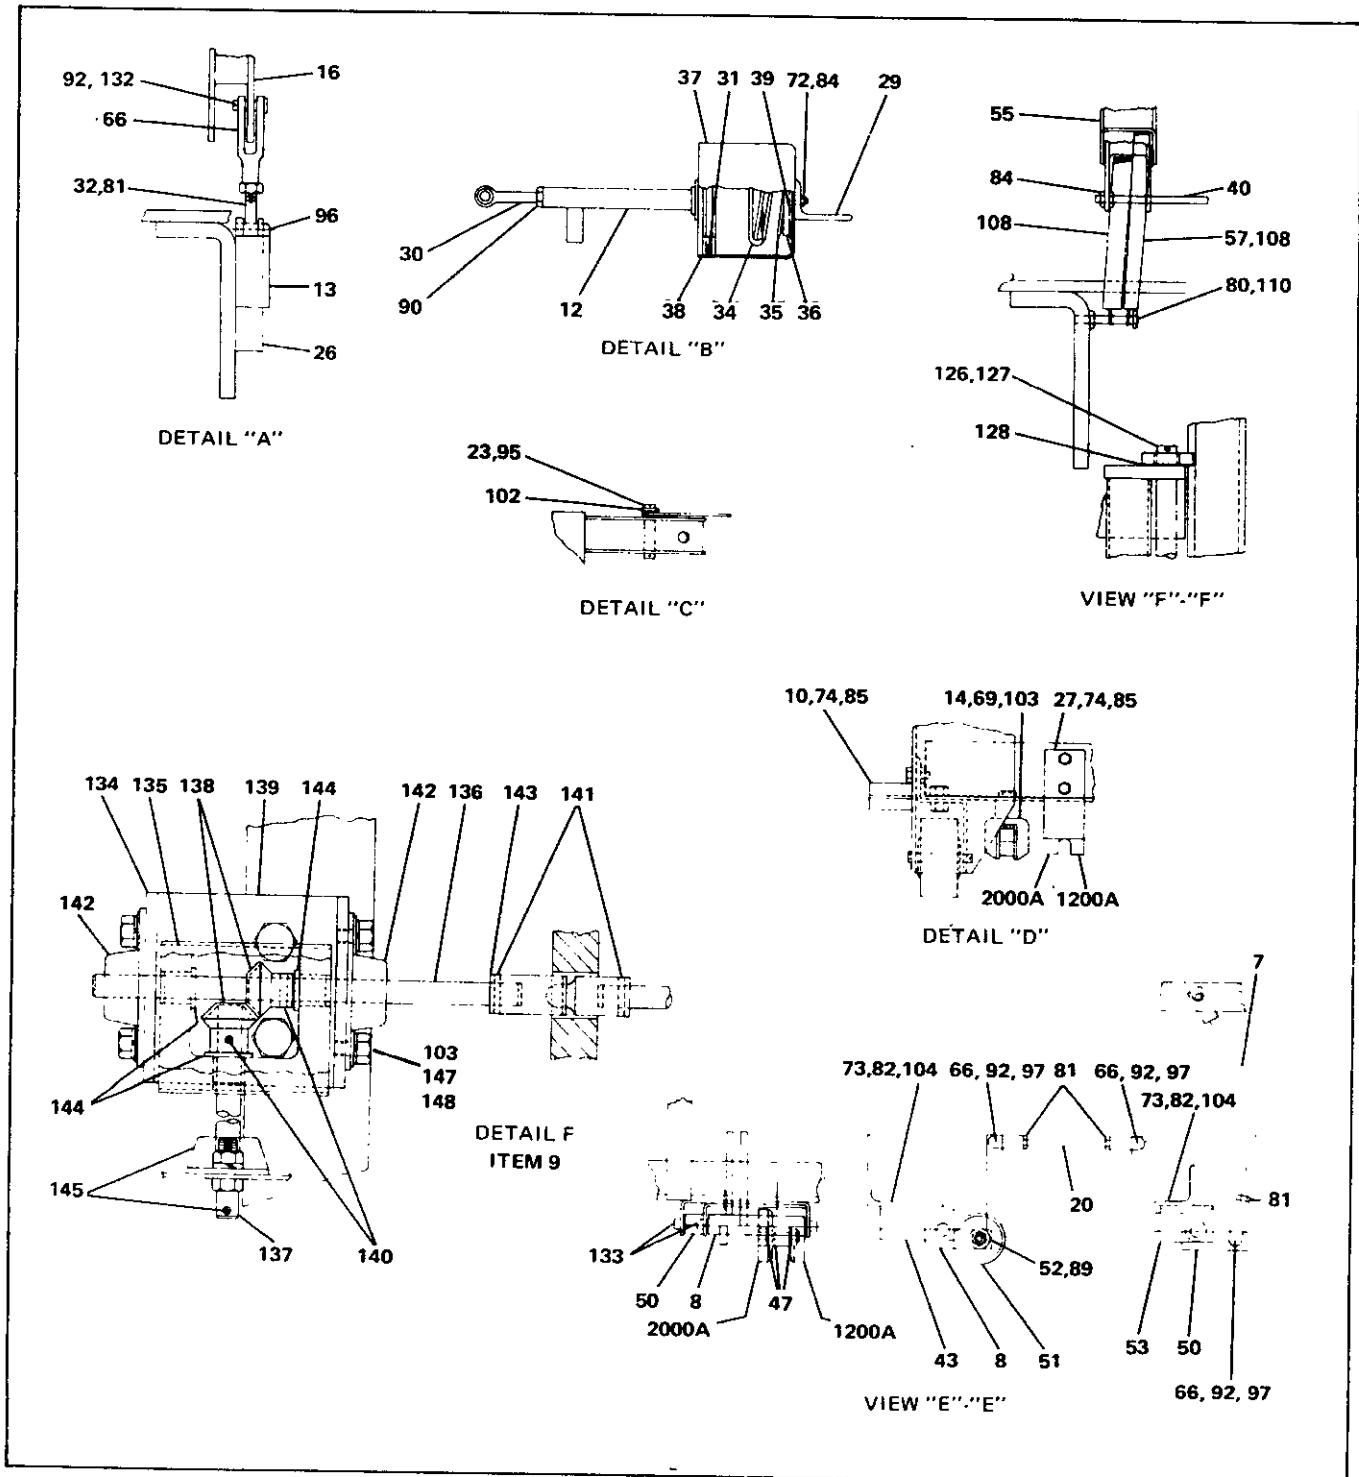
Stored Energy Frame & Operator Assembly (continued)
